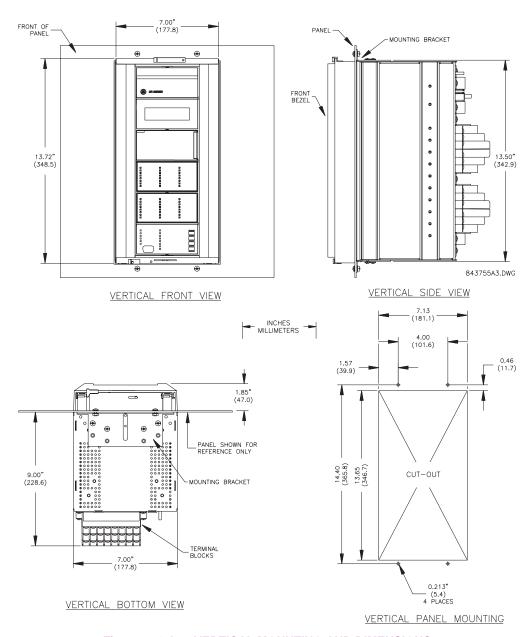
L60 VERTICAL MOUNTING AND DIMENSIONS
